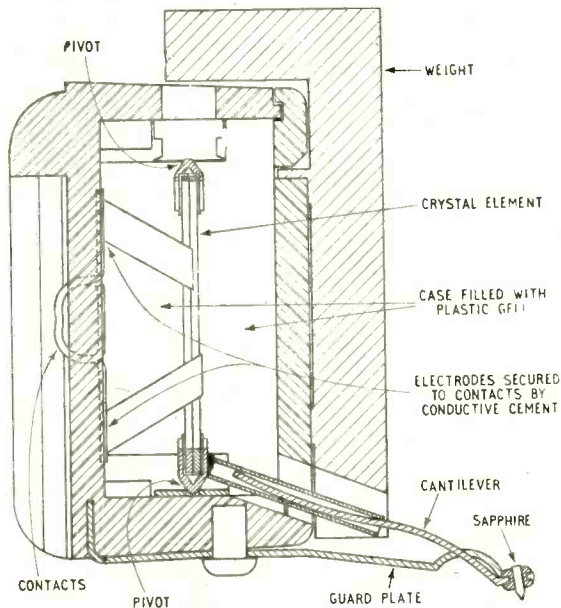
Sectional drawing of Acos G.P.20 pickup.
